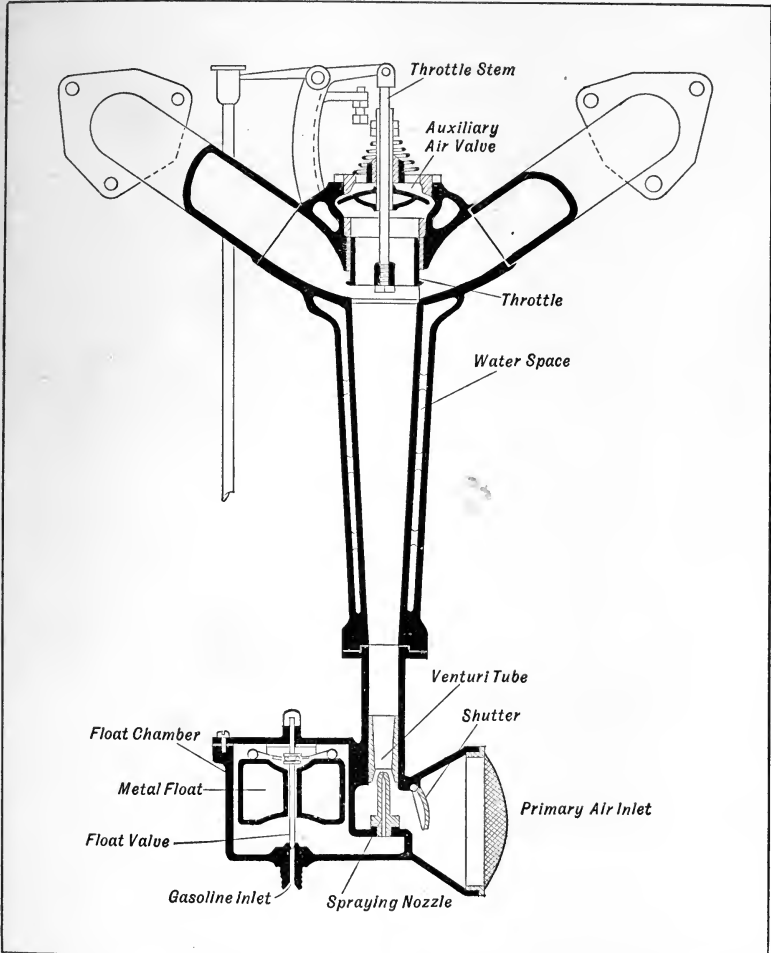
Peerless Carburetor, which is Combined with Induction Manifold. Has Spray Nozzle and Float Chamber at Bottom and Air Valve at Top.
